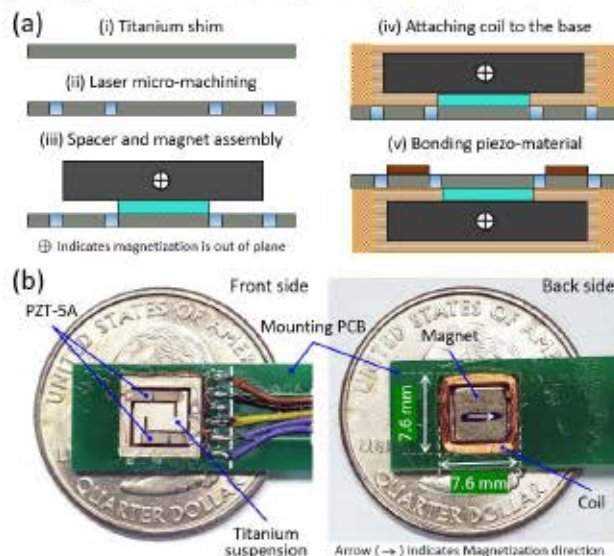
(a) Schematics of the fabrication and assembly process steps of the receiver and (b) photographs of the ready to test, fully assembled prototype with size compared to the US quarter dollar.
